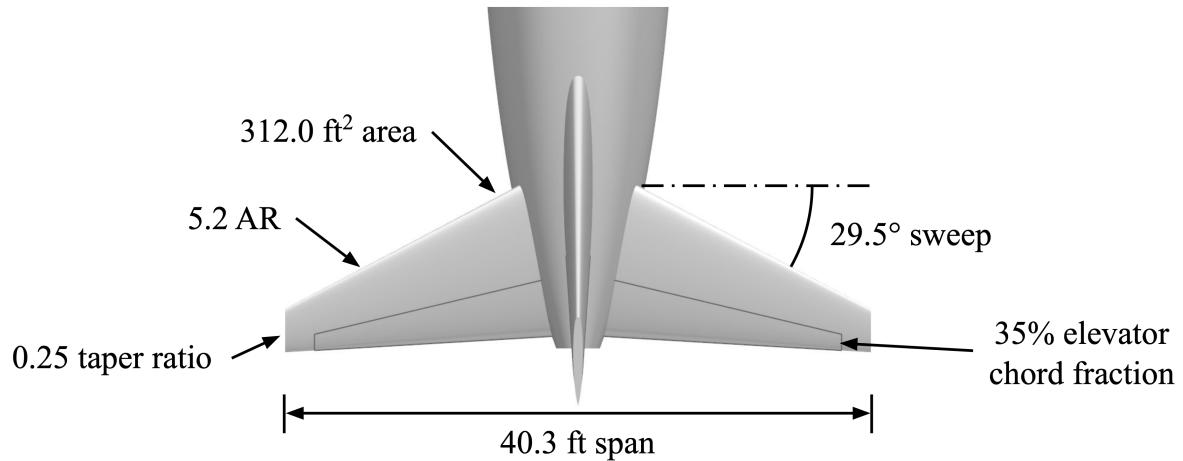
Layout and geometry of the horizontal tail with relevant dimensions
